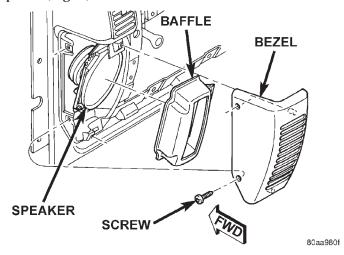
Instrument Panel Speaker Bezel Remove/ Install
